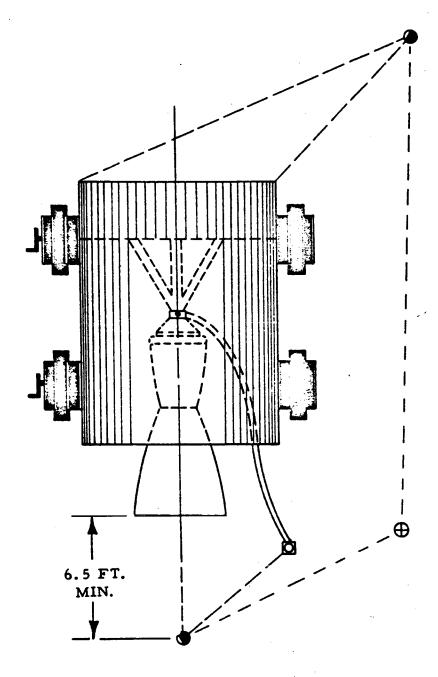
S-3D Rocket Engine Alignment Tolerances
